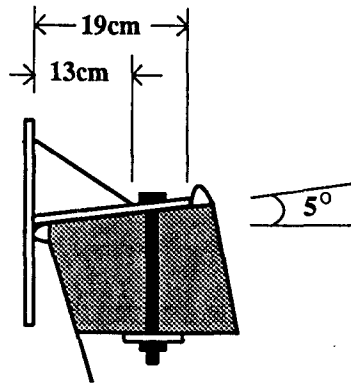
End view of mounting bracket showing the 5° angle and foam core of the gunwale.
